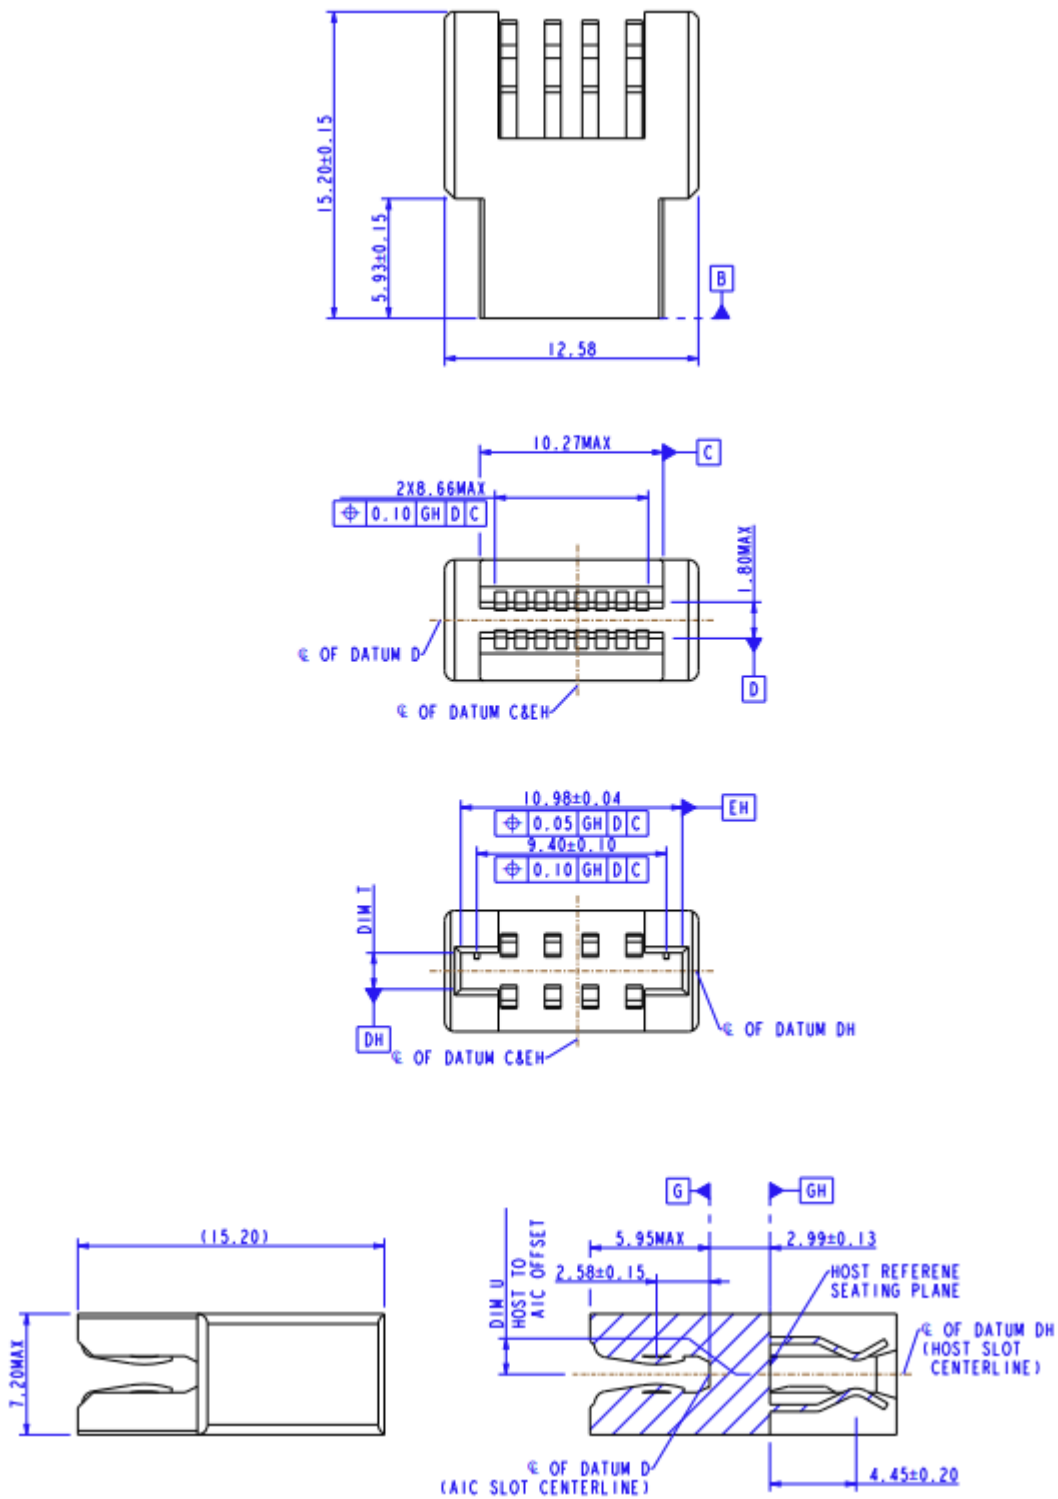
Straddle Mount PMM x16 108pin Connector Dimensions
